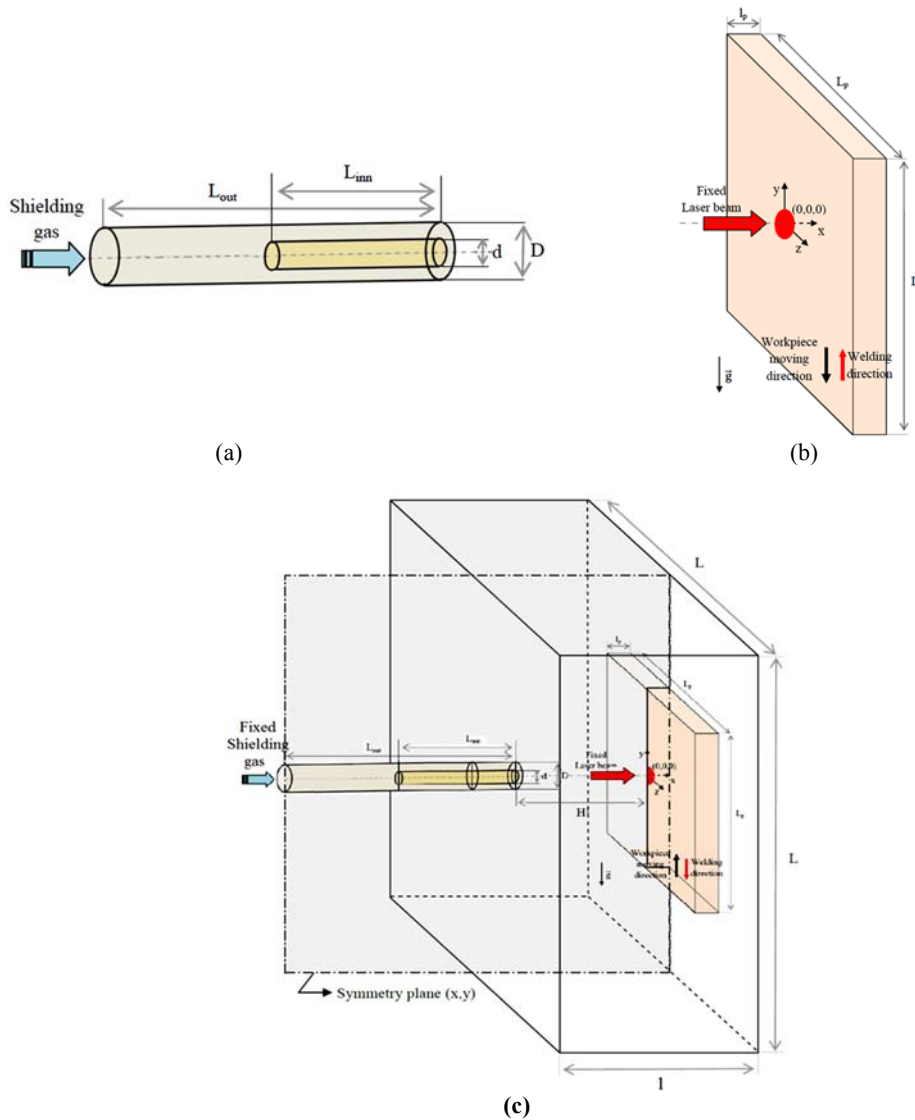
Geometric configuration: (a) coaxial shielding gas tubes, (b) Workpiece, (c) Assembled model.
